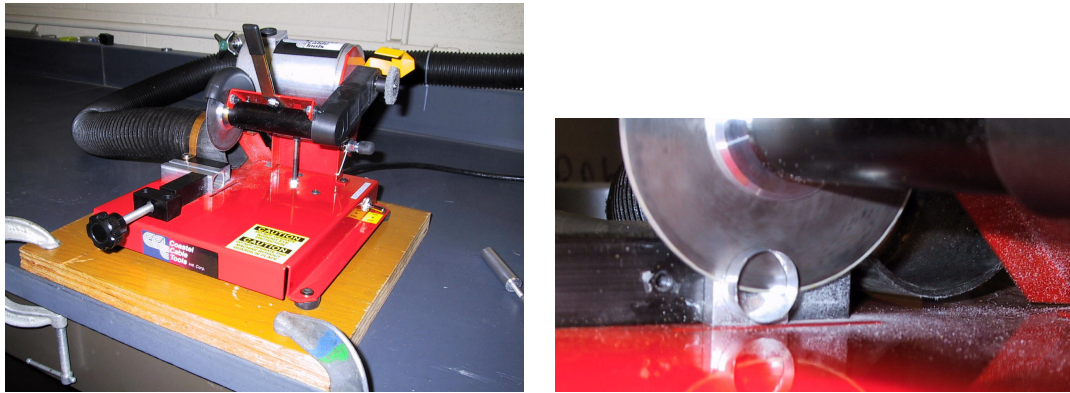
The high-speed saw used to cut the CDC straw tubes to the appropriate length. The black knob on the left-side of the saw tightens a clamp that holds the tubes in place for cutting. The right-hand picture shows a straw being cut by the saw.
